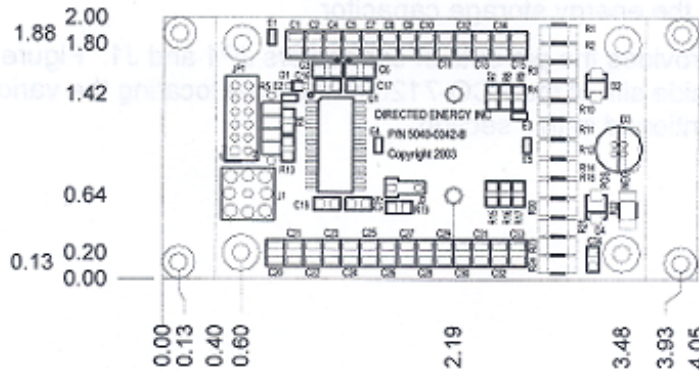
B – PCO-7120 Dimensional Drawing With Heat Spreader
